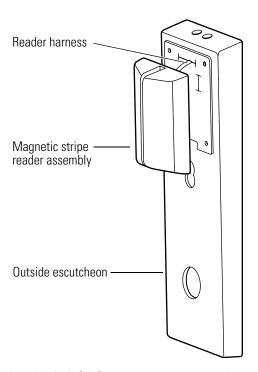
Removing the B.A.S.I.S. magnetic stripe reader assembly from the outside escutcheon
